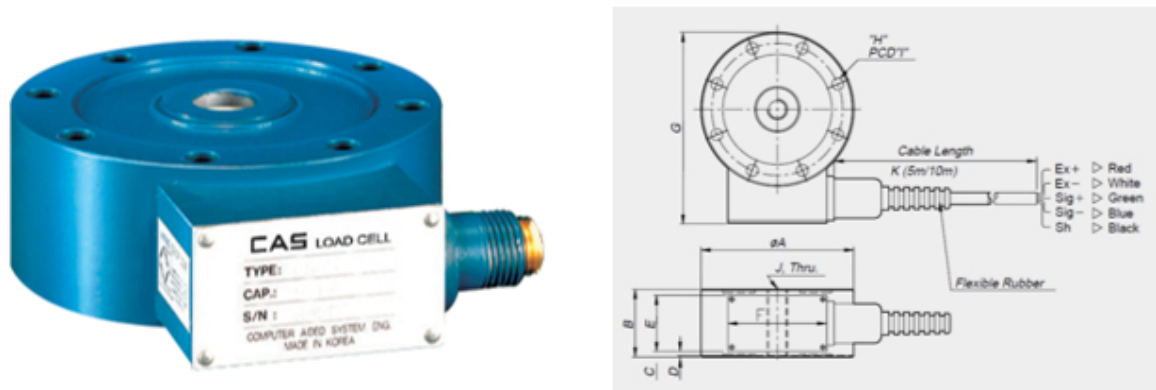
Front view of the load cell and load cell dimensional drawing.
